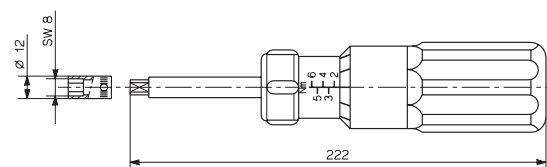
Torque wrench 1 ... 6 N-m Type 1300A17
